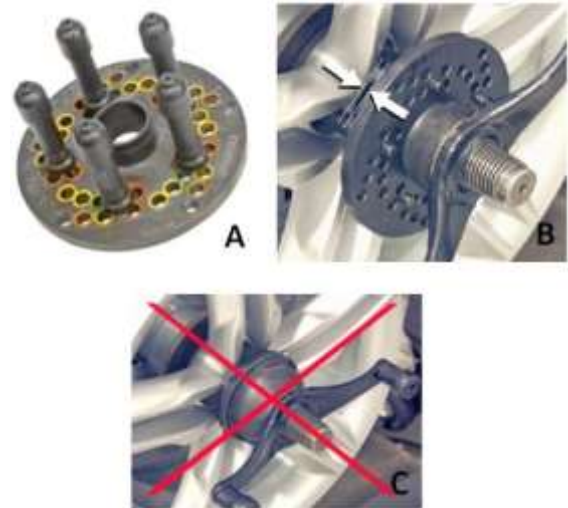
Five-finger style clamping plate (A), wheel properly mounted with a five-finger style clamp (B), and wheel mounted using an incorrect clamping tool/method (C).
